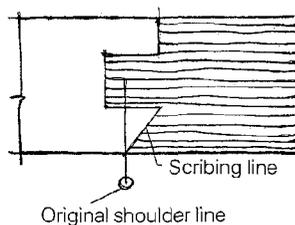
To bring the chamfer around the corner in a 90° arc, cut most of the bevel before assembly. The corner round should be completed after gluing up because of the fragile short grain on the rail.
